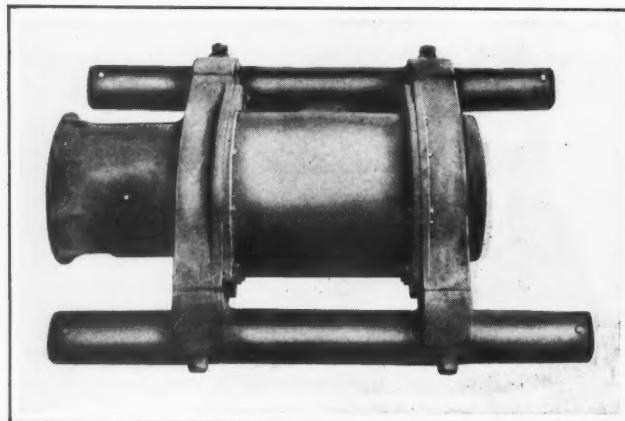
Crane Trolley Replaced by Welded Type
